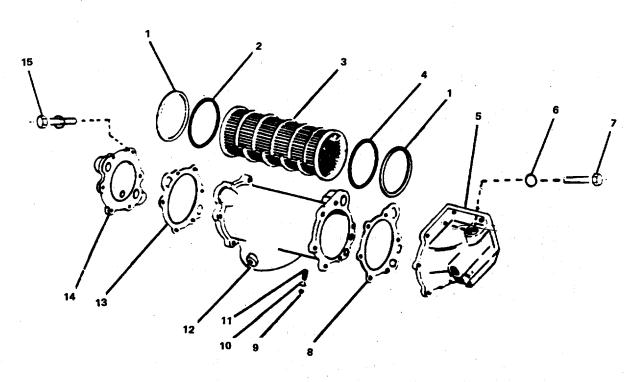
Oil Cooler/Filter - Filter Element Removed.
